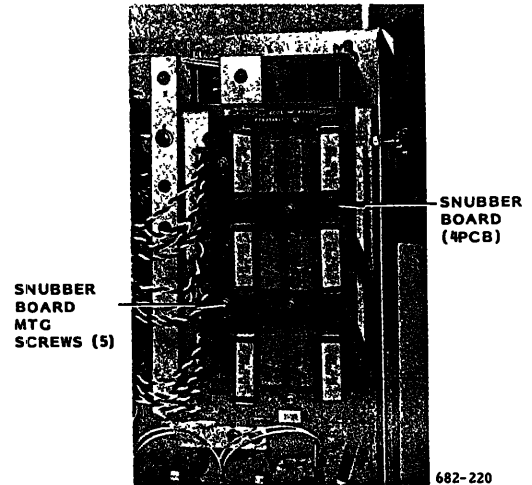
Main Circuit Thyristor Assembly (460 V, 105 A)
